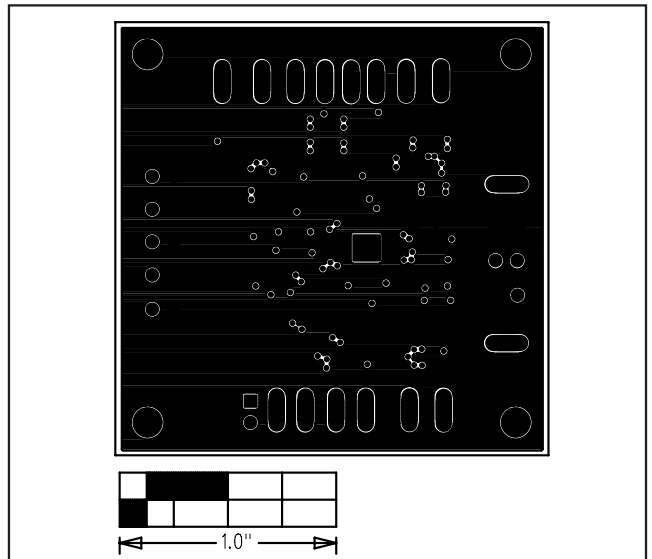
MAX8680 EV Kit PCB Layout—VSU Layer
